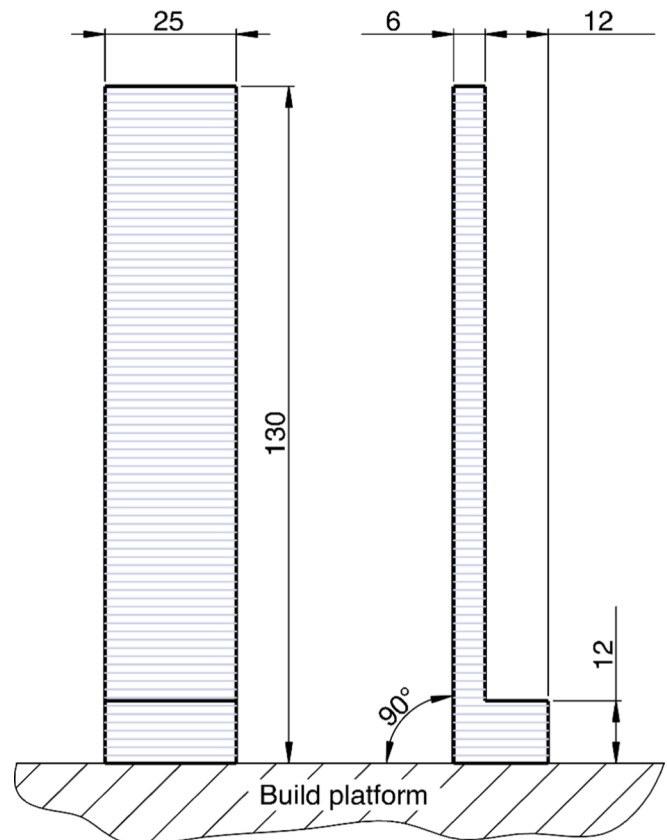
Titanium adherends, front view on the left and side view on the right. Grey horizontal lines represent the layers. All dimensions are in millimetres.
